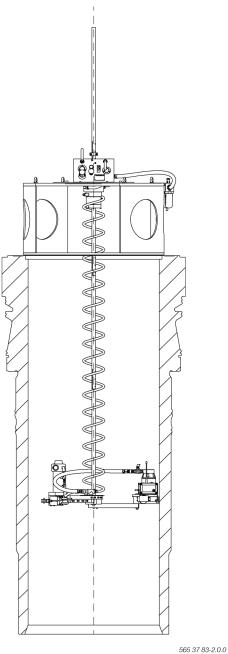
Cylinder with wave-cut machine and wave-cut pattern
